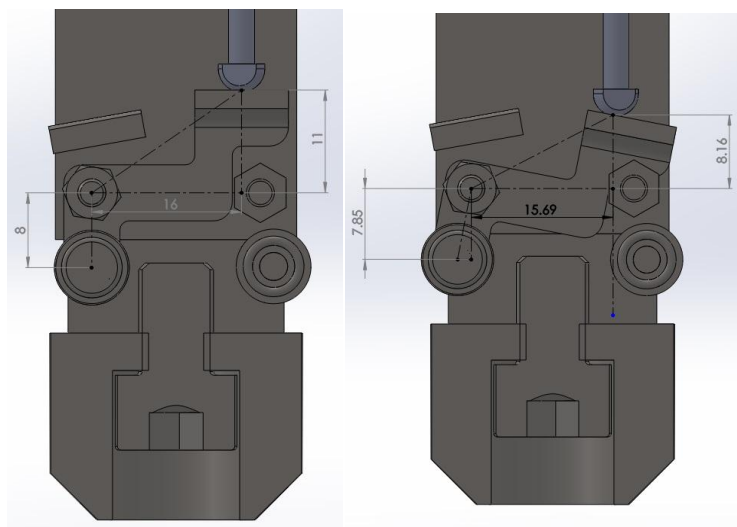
Section view of Minimole measurement arms showing measurement dimensions with arm in (left, and arm out (right)
